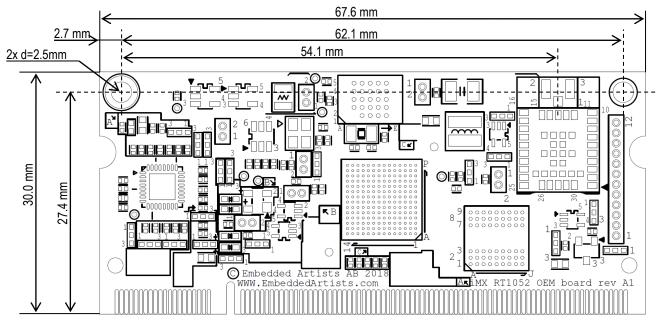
iMX RT1052/62 OEM Board Mechanical Outline
